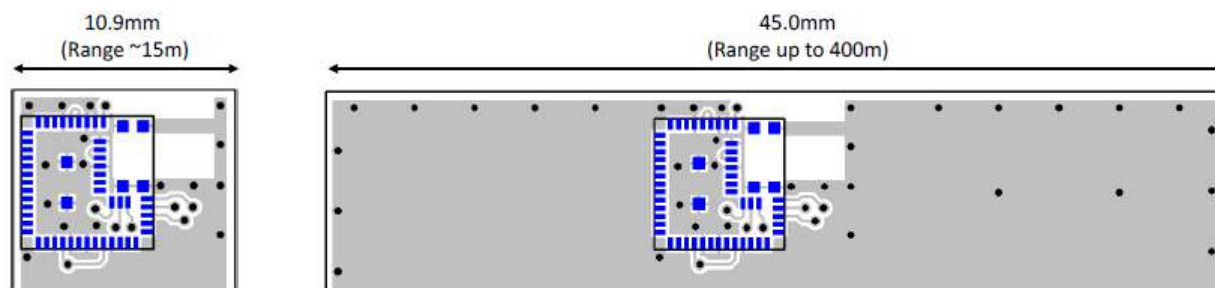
BGM121/BGM123 PCB Top Layer Design
